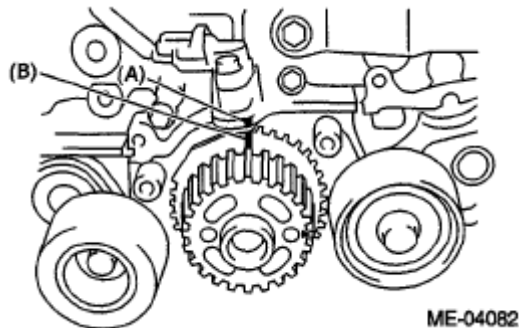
Identifying Alignment Mark On Crank Sprocket
